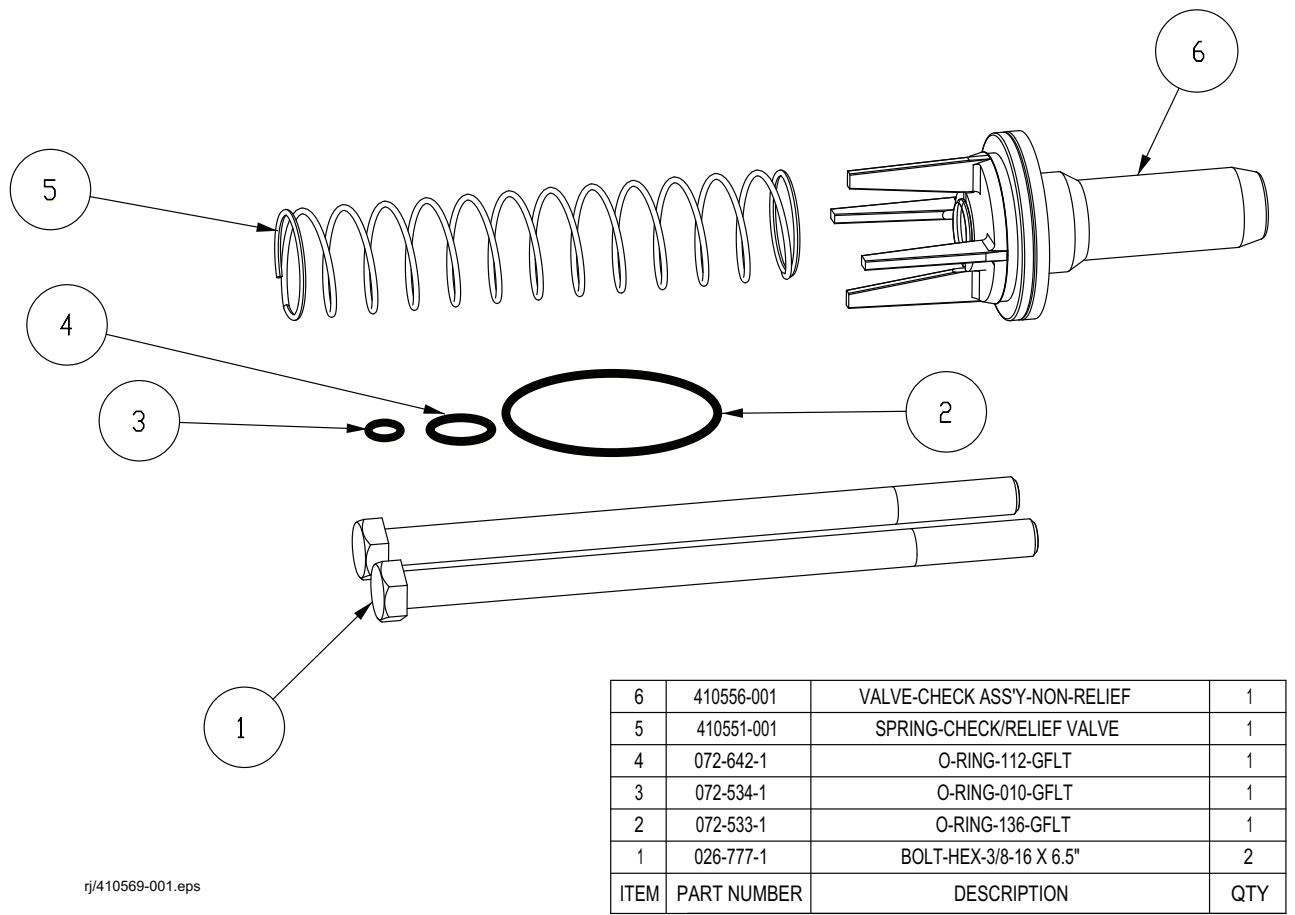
Service Kit 410569-001 Check Valve (Non-Pressure Relief Version), Spring, Fasteners, Seals
